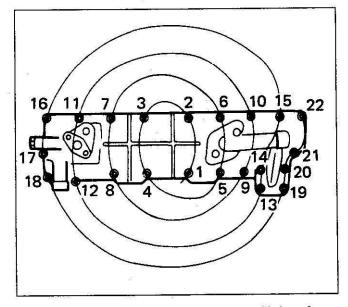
Oil Cooler Mounting Bolts Tightening Sequence
